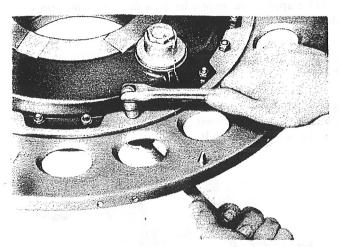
Removing Cover Mounting Bolts which Hold Bulkhead
